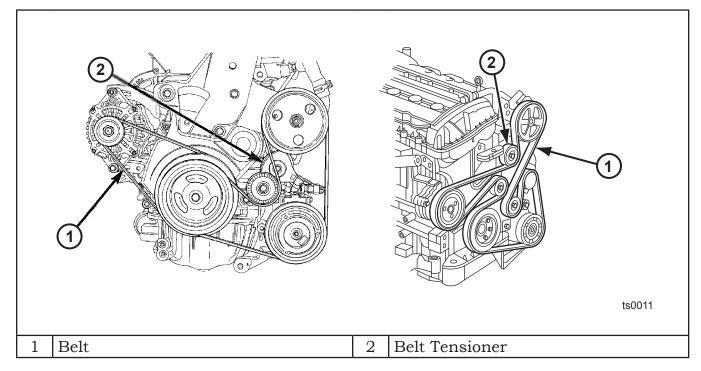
Accessory Drive Belt (2.4L PT, 2.0/2.4L JS)
